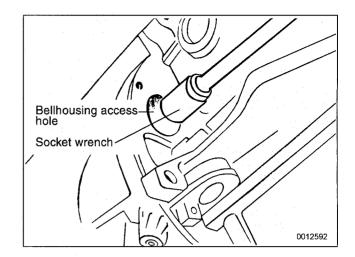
Access and remove torque converter bolts through hole in bellhousing cover.
